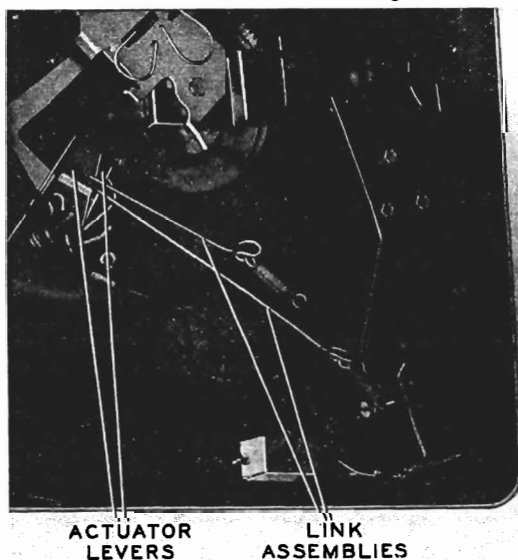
LINK ASSEMBLIES AND ACTUATOR LEVERS
